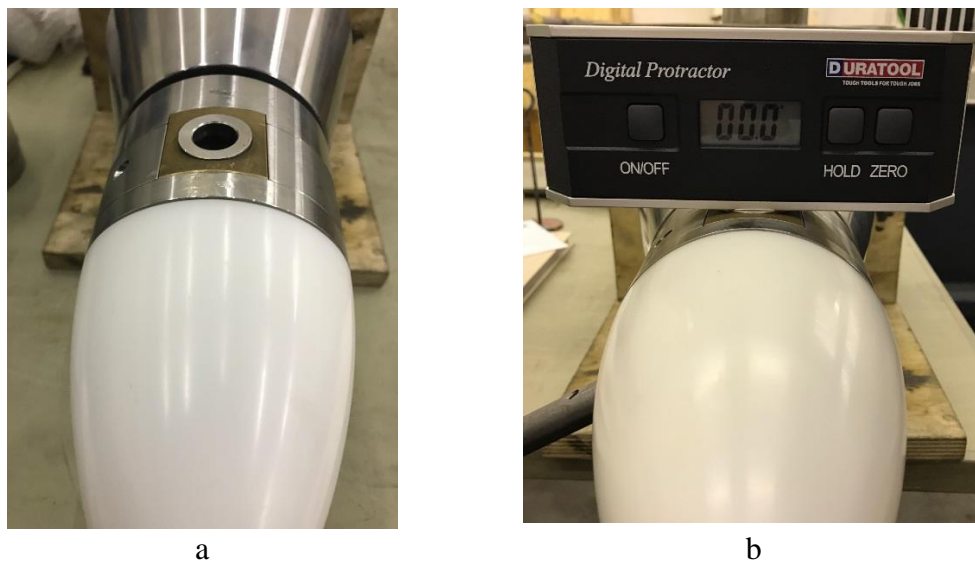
Blade positioning setup, a) Blade Housing b) Setting the housing position using a digital protractor.
